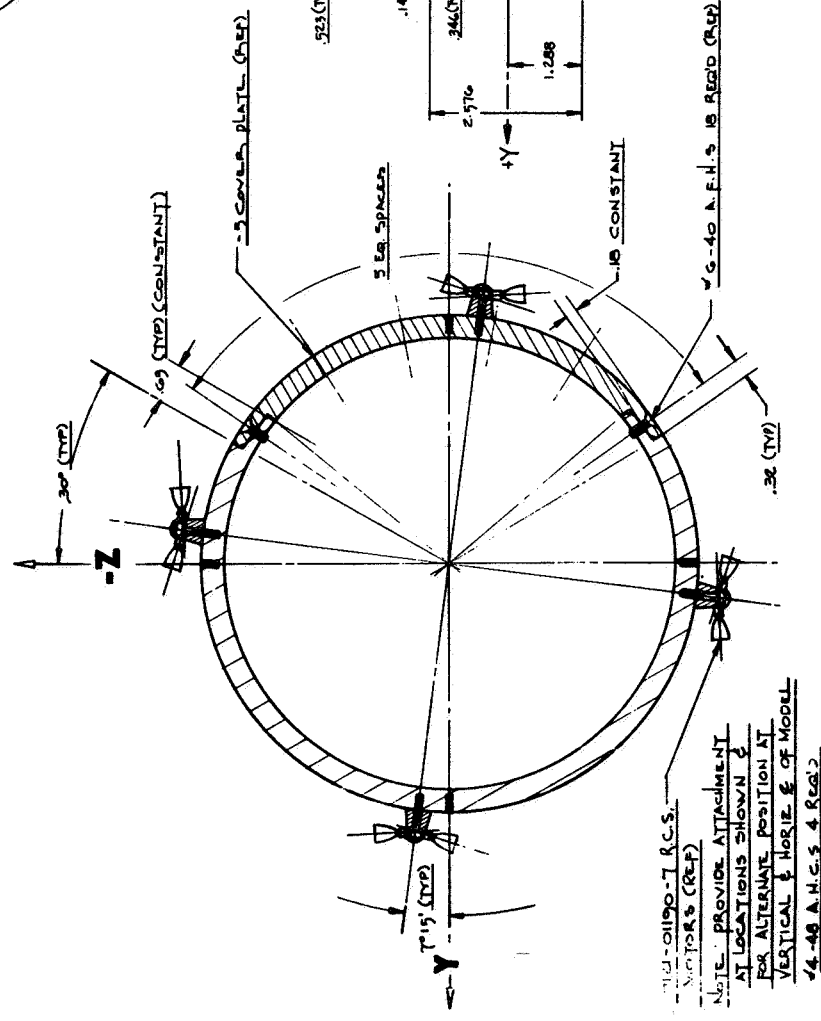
LAUNCH ESCAPE MOTOR NOZZLE 31 REAR
